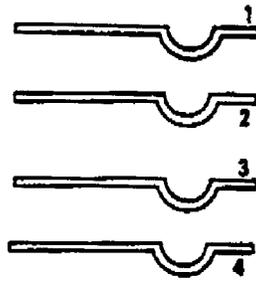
ALTERNATE TEST SETUP AND SURFACE IDENTIFICATION FOR ONE-SIDED (DISSIMILAR) COATING
